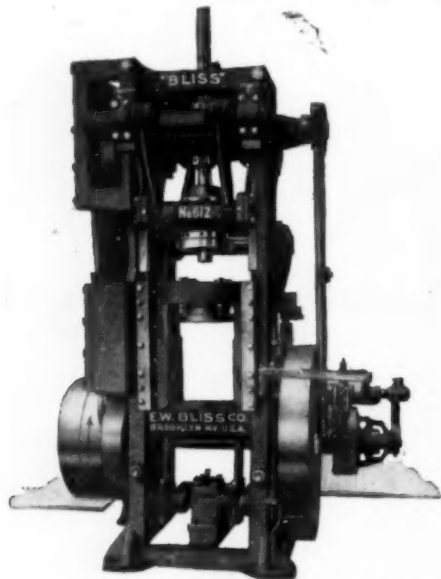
PRESS FOR CUTTING BLANKS UP TO 12 IN. IN DIAMETER.
